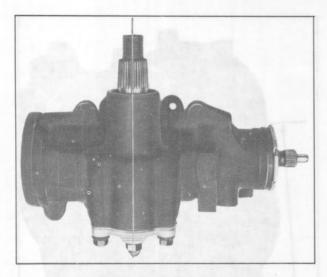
Block Tooth on Pitman Shaft in Line With Over-Center Preload Adjuster
